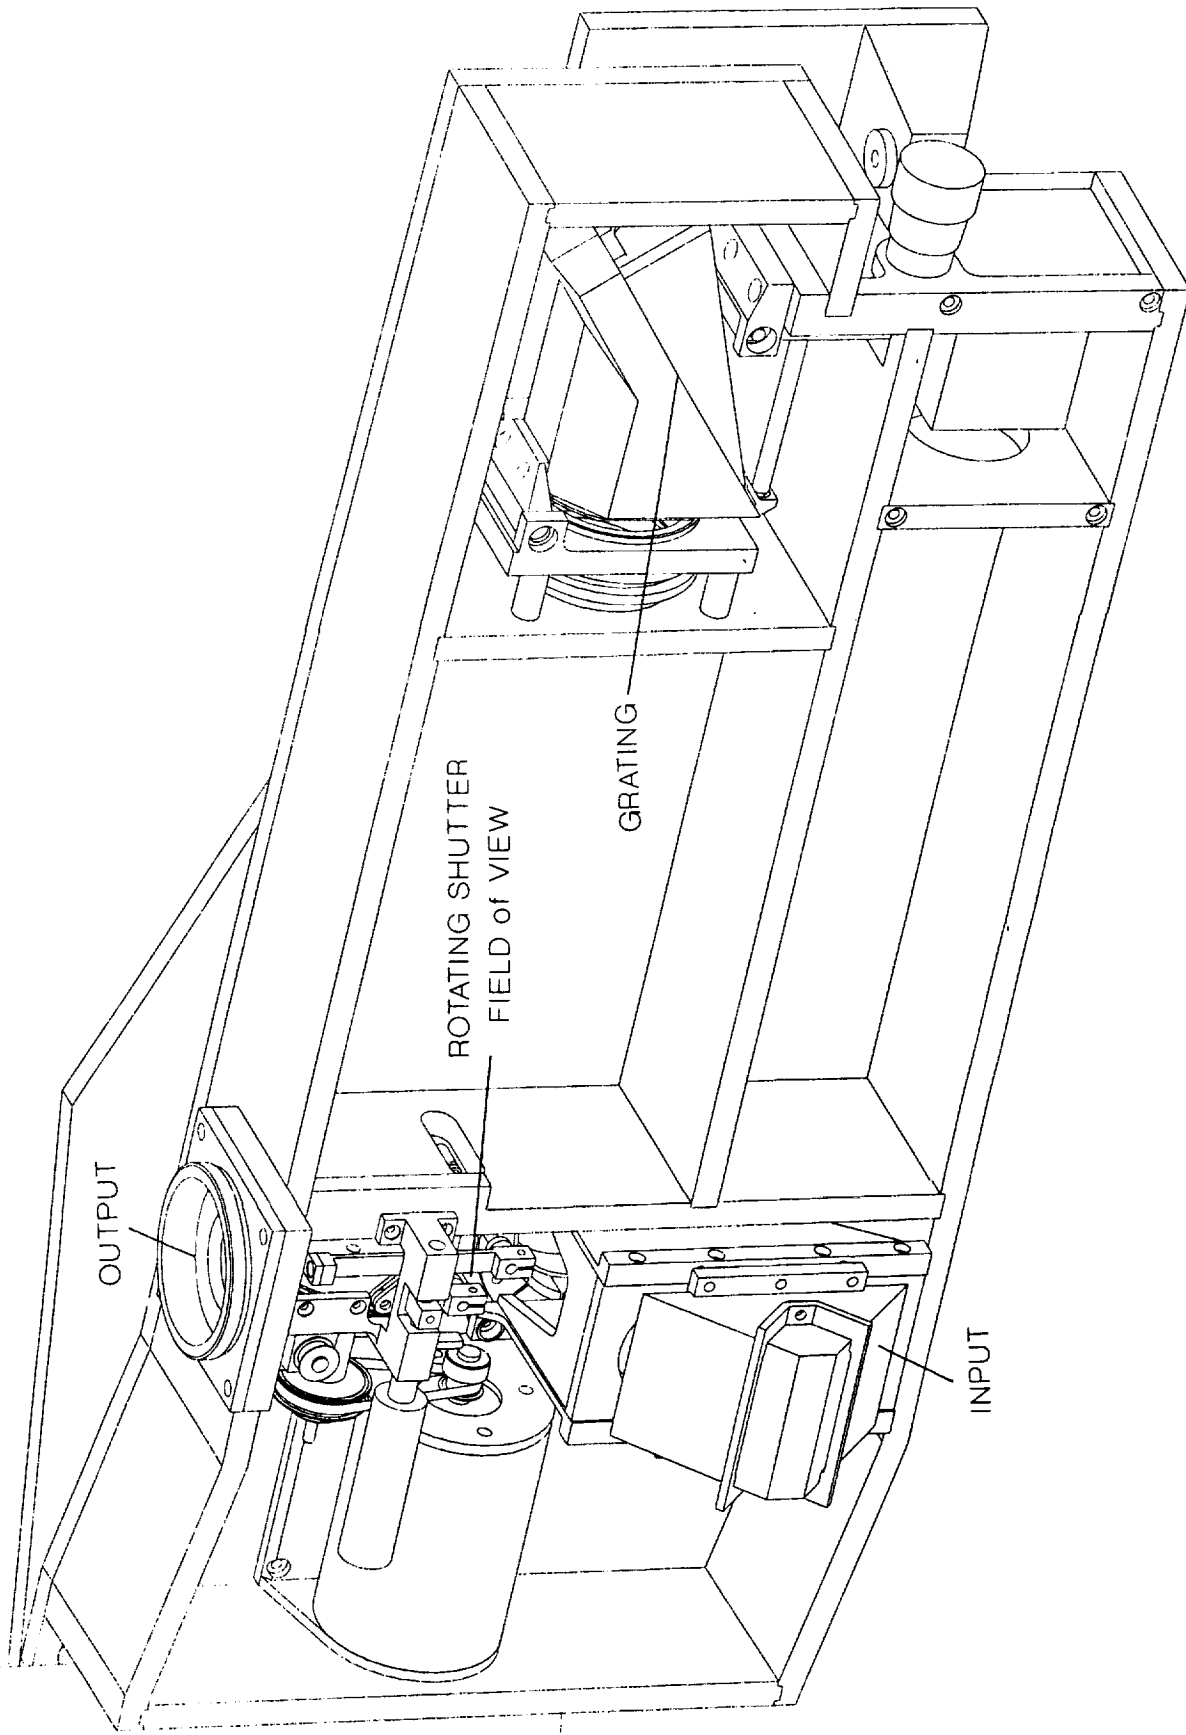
Mechanical Layout of the MTLRS#1 Receiver Package
